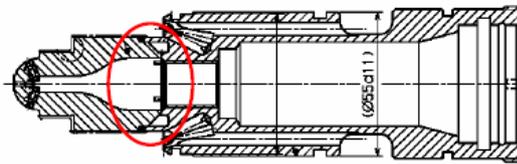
Prechamber/spark-plug sleeve assembly (old design)
